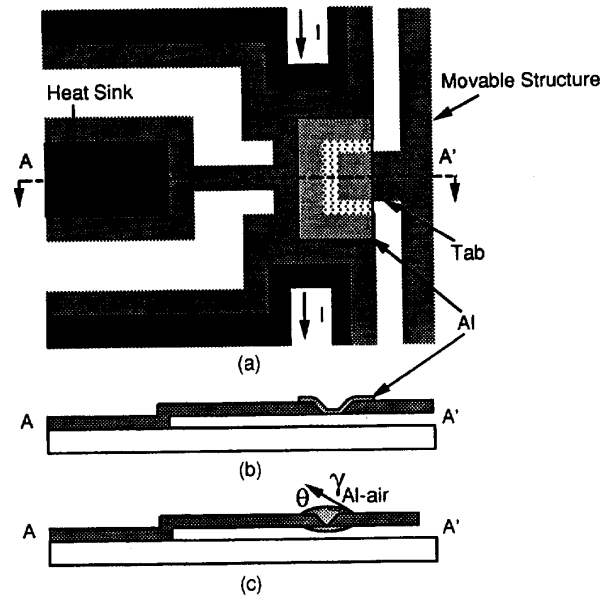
Schematic drawing of a welding structure. a) Top view. b) Side view. c) Side view after melting Al.
